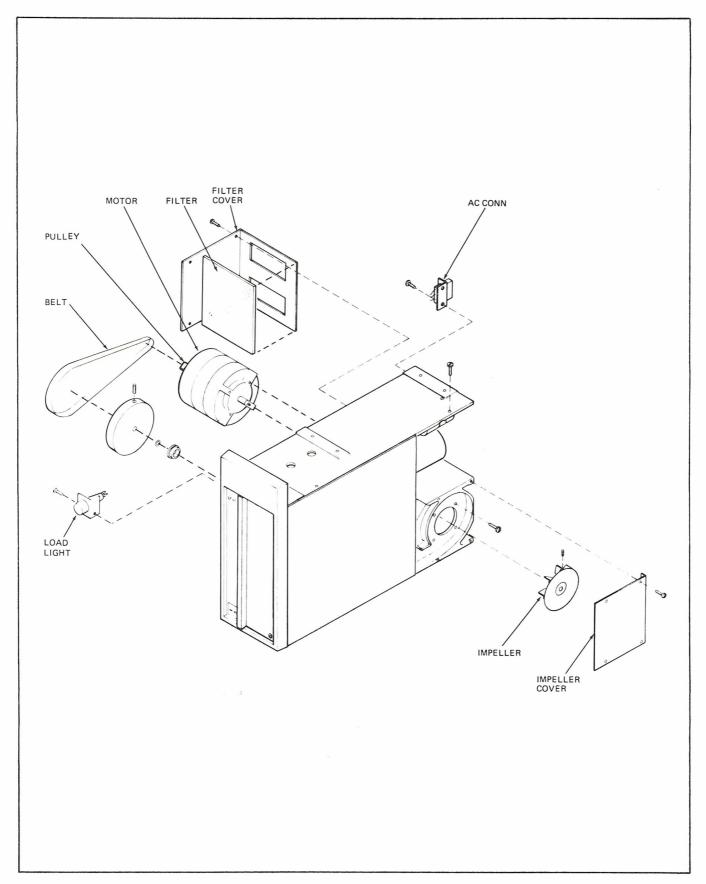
DRIVE MOTOR ASSEMBLY
